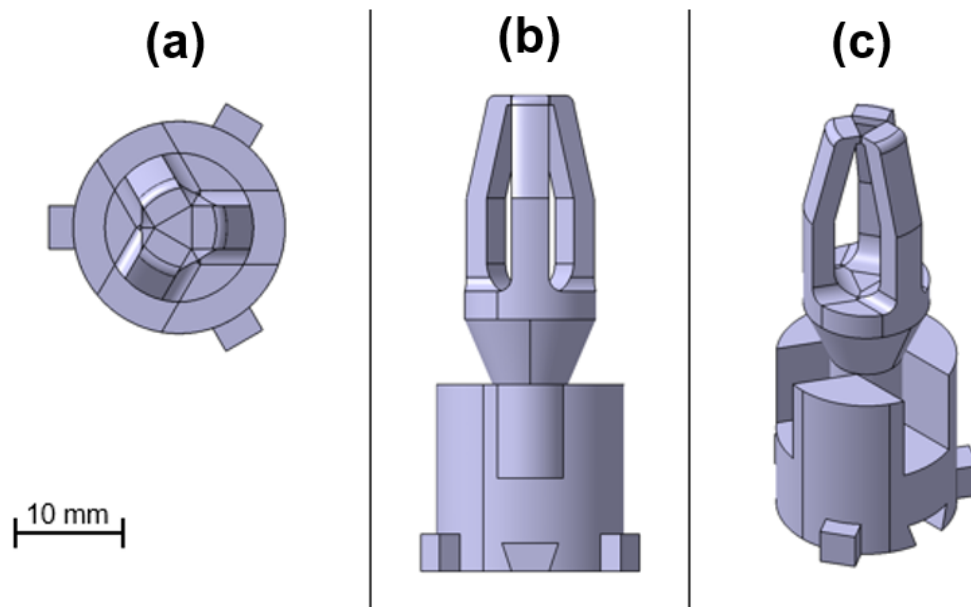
First design of the gripping system in different views: (a) top view, (b) side view, (c) three-dimensional view.
